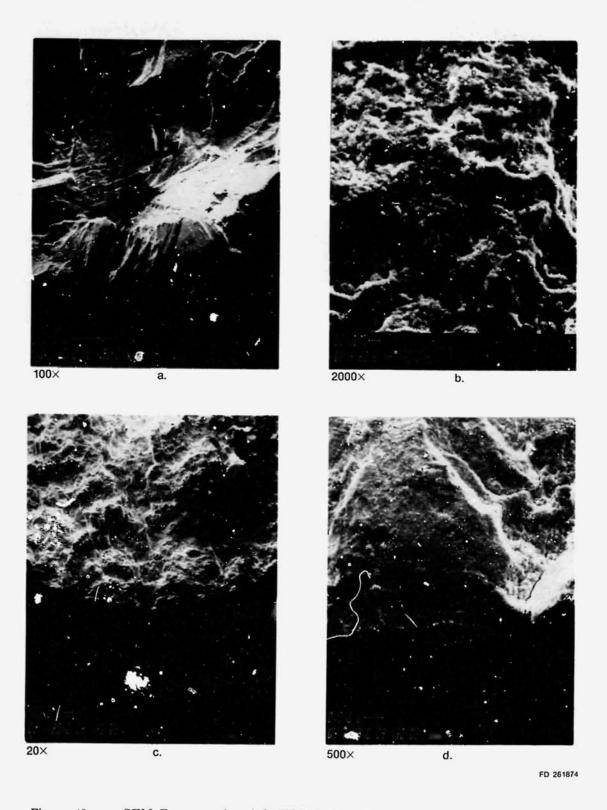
SEM Fractographs of GATORIZED® AF2-1DA Samples No. 14 (Top) and No. 21 (Bottom) Showing Faceted Stage I Origin (a), Heavily Oxidized Transgranular Fracture (b), and Surface Origins (c), Oxidized Transgranular Fracture With Striations (d)
